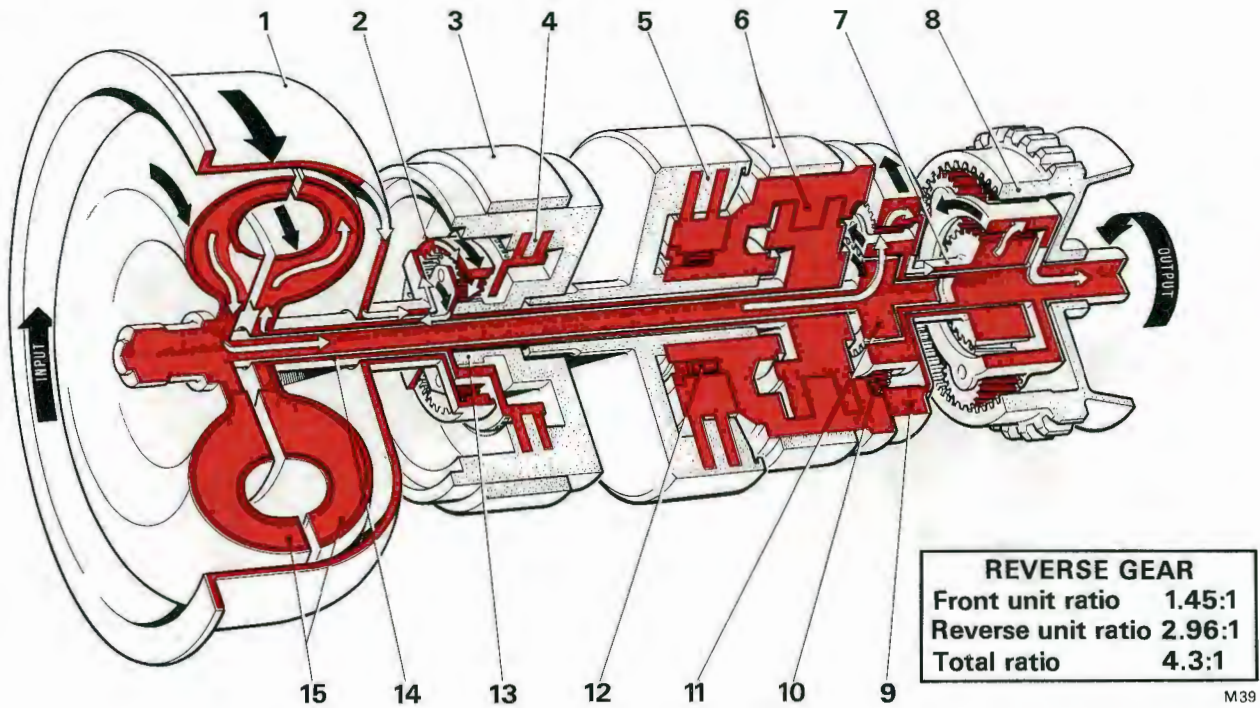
LINE OF DRIVE IN REVERSE GEAR
